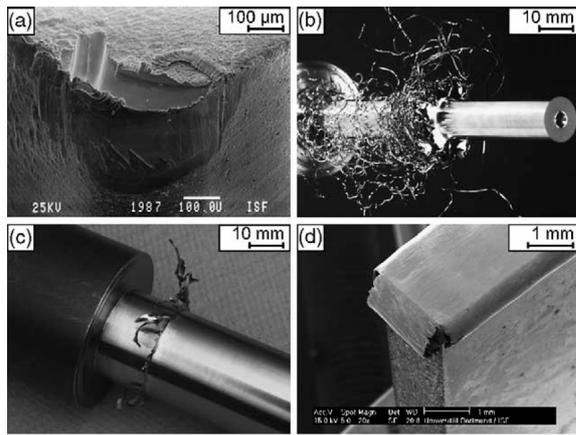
Problems while machining of Nitinol alloy. a) tool wear b) chip sticking c,d) burr generation after turning or grinding [2].
